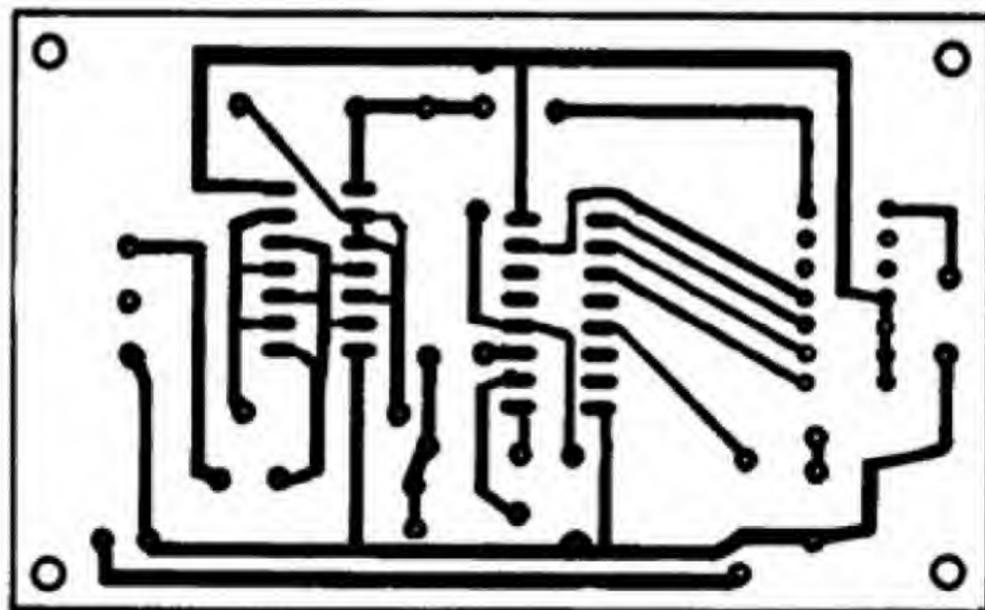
PCB layout for the circuit shown in Fig. 2.
